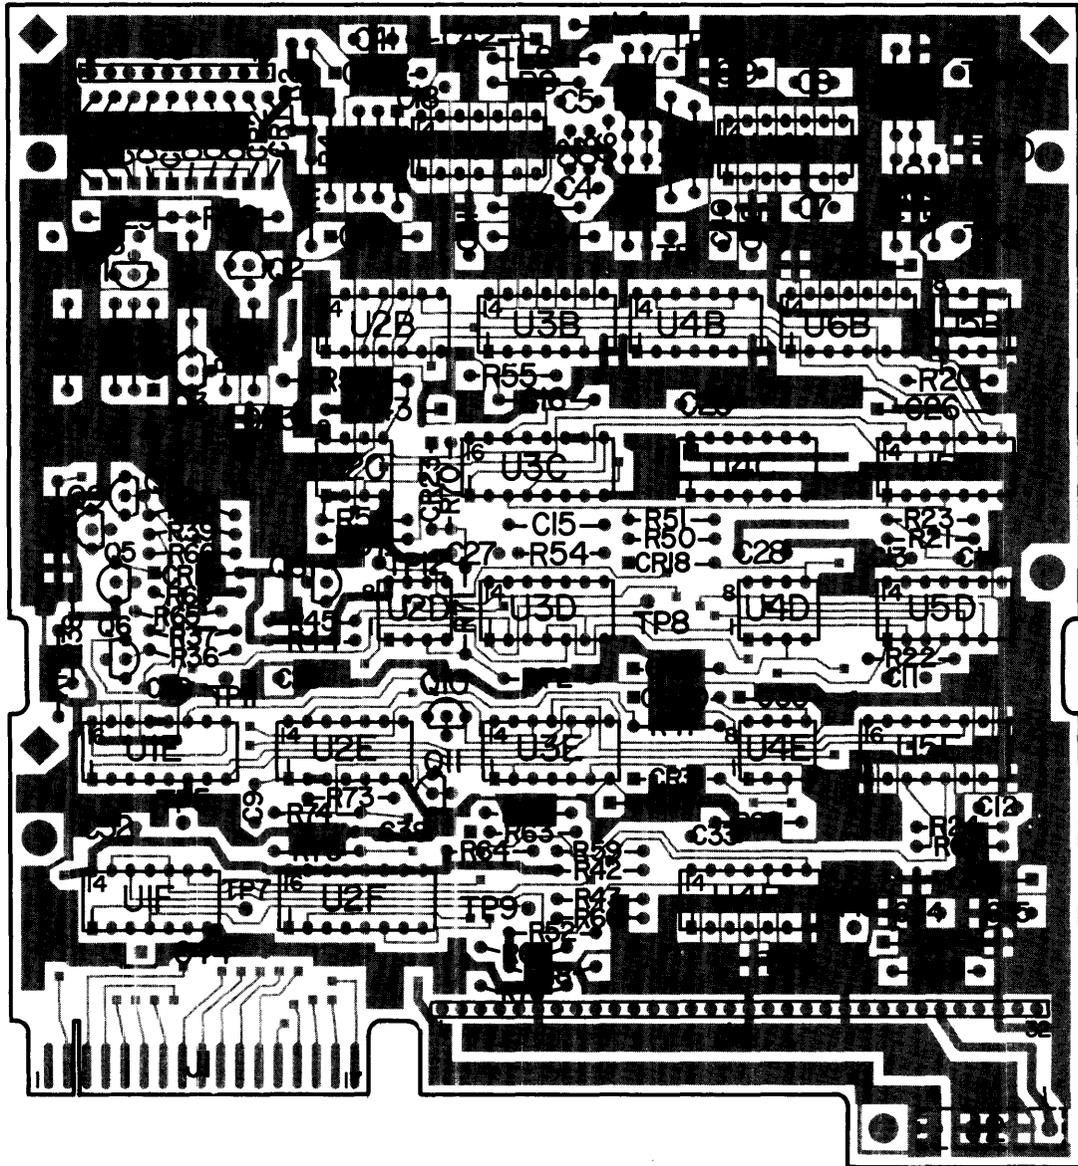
Drive Board P/N 09130-66501 Component Locator
